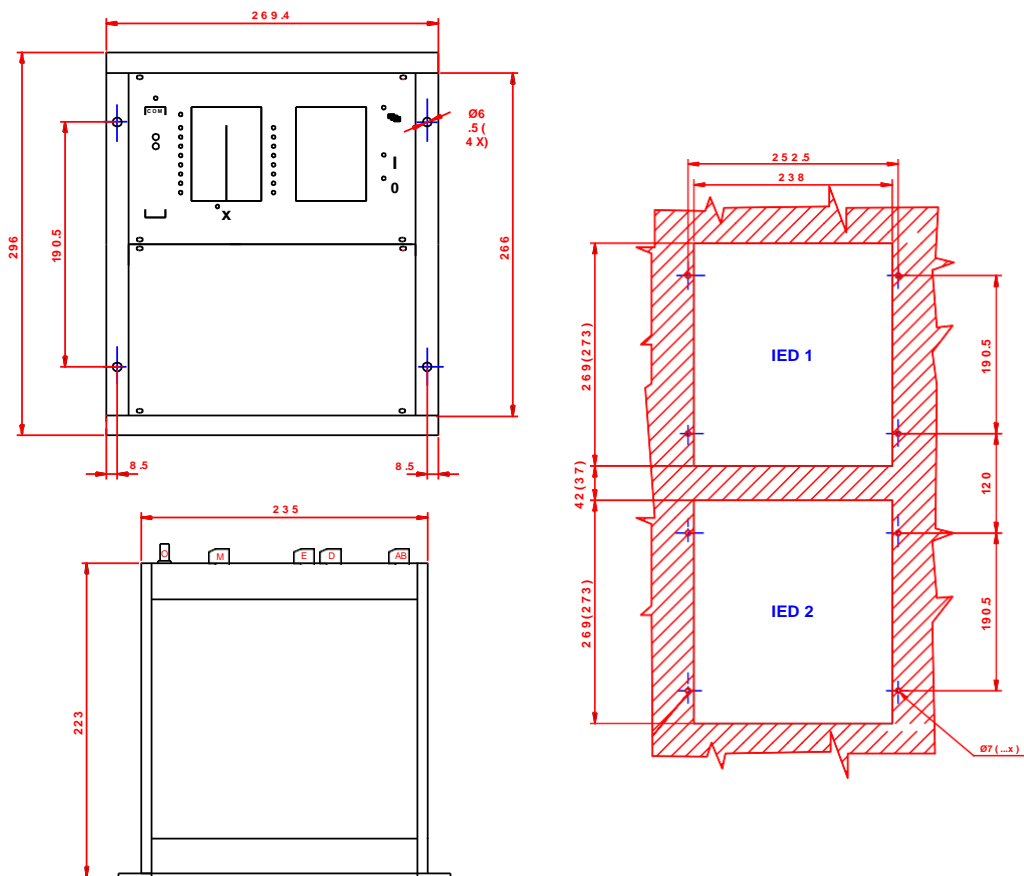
Dimensions for flush mounting of 42 HP double rack
